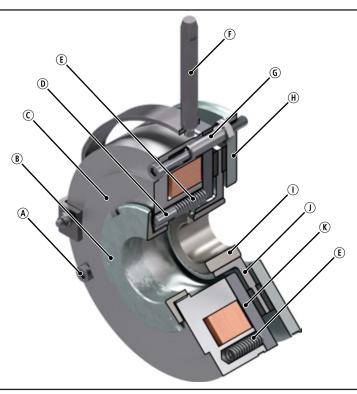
Design of a INTORQ BFK458 spring-applied brake Basic module E (complete stator) + rotor + hub + flange / friction plate
